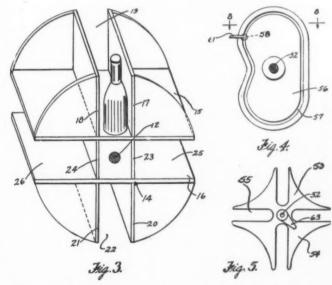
Perspective view of bottle receiving member. Fig. 4—Elevational detail view of cam member employed in the device. Fig. 5—Detail view of star wheel and cam member
